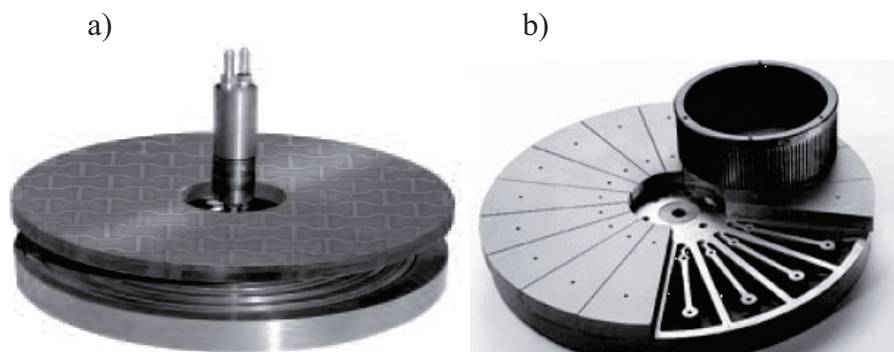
Water-cooled wheels: a) manufactured by LAMPLAN, b) manufactured by PETER WOLTERS [8, 10]
